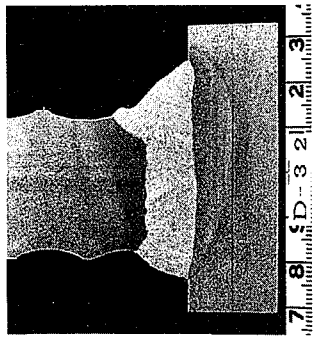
Sectional macro-photograph of weld by NS-MAG Method
